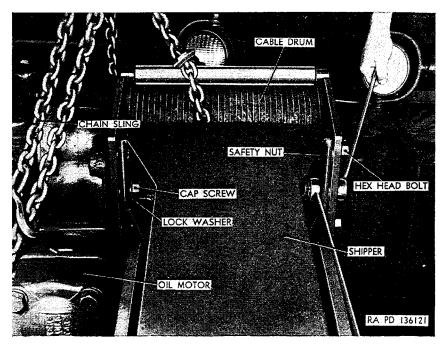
Removing boom hoist hydraulic oil motor and cable drum M62 and M246.
